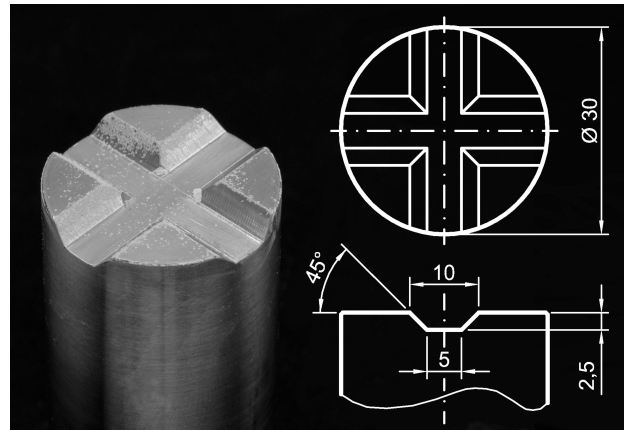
The cross-shaped punch (quotes are in mm) used to form the pieces shown in Fig. 9.
